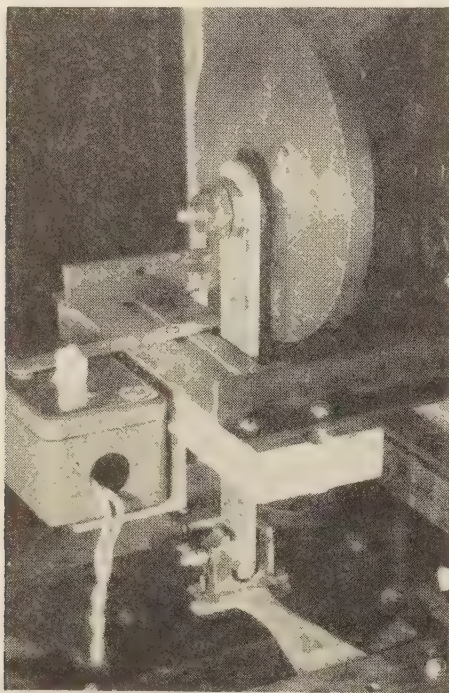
CANTILEVER-TYPE MACHINE EMPLOYED WITH FATIGUE SPECIMENS
